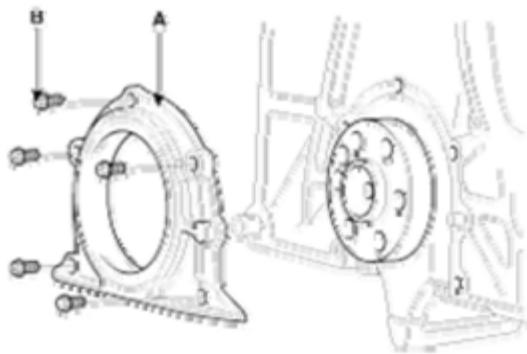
Identifying Rear Oil Seal Case & Bolts
